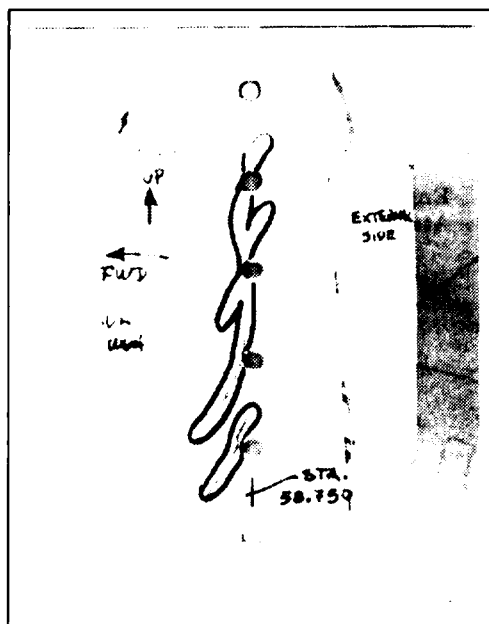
MULTIPLE-SITE DAMAGE SURFACE FATIGUE CRACKS
